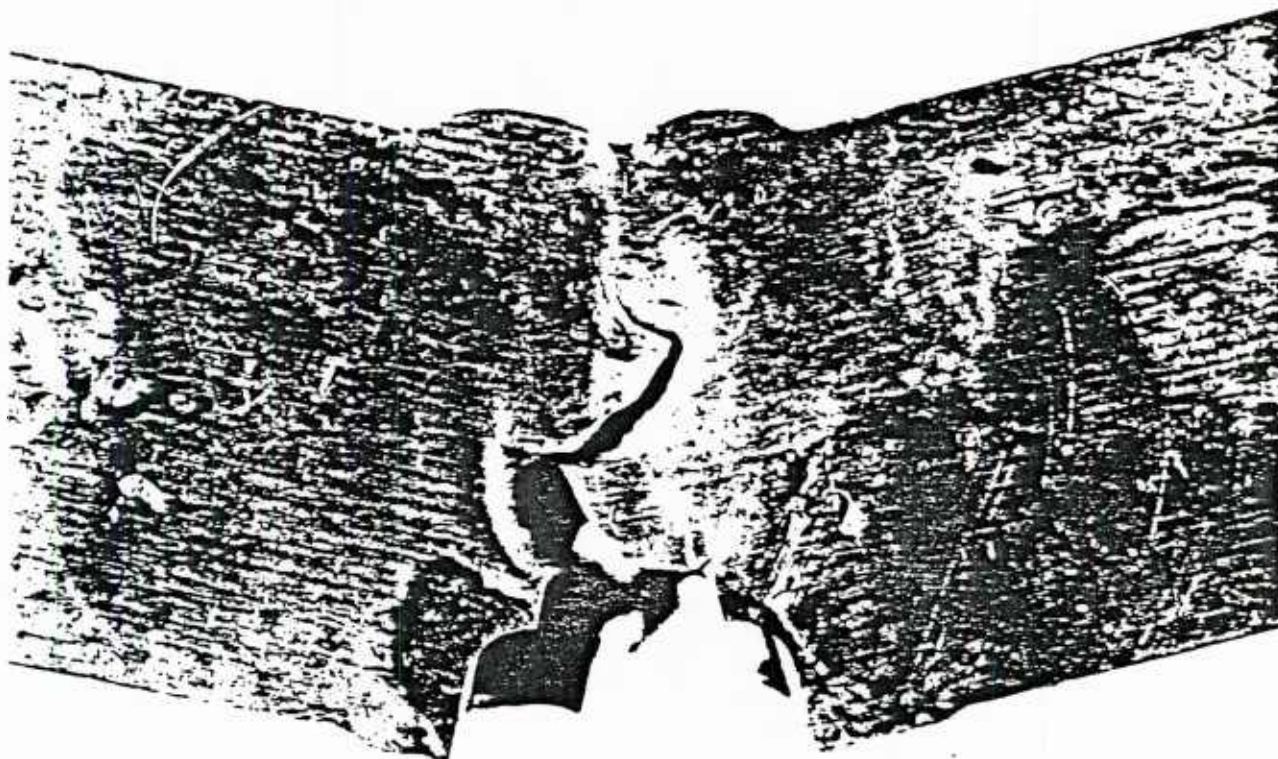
POST TEST APPEARANCE OF HY80 WELDED SPECIMEN
